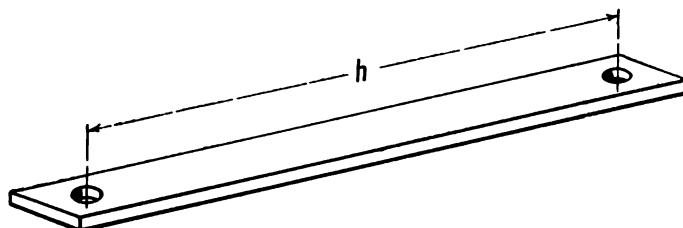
Jig for Locating Centers of Flask Pins on Machines
